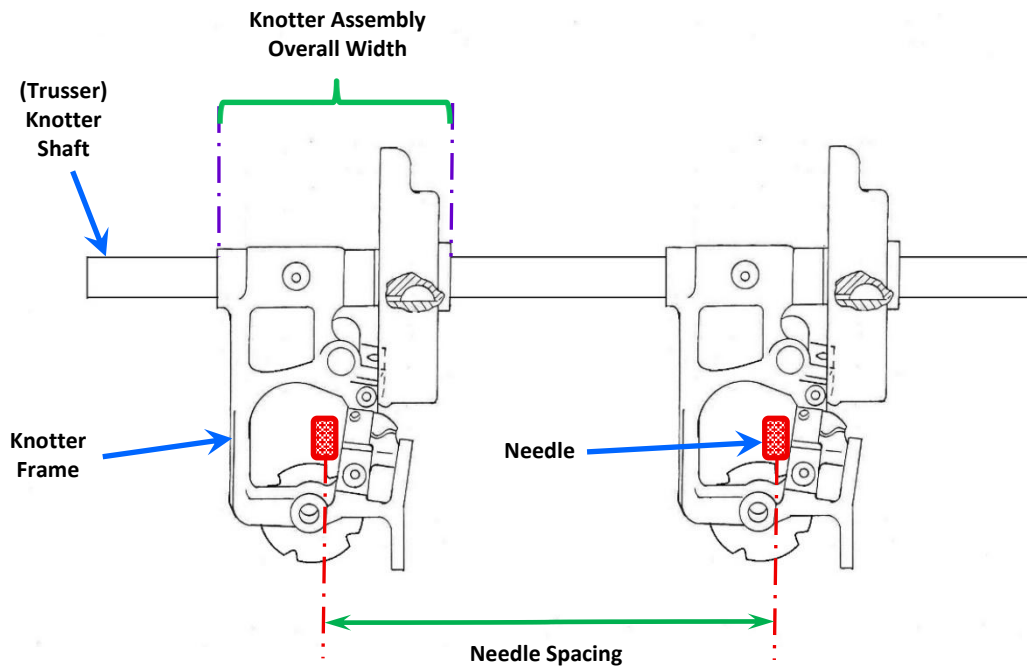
Arrangement of replacement knotter components on the knotter shaft – Important dimensions
